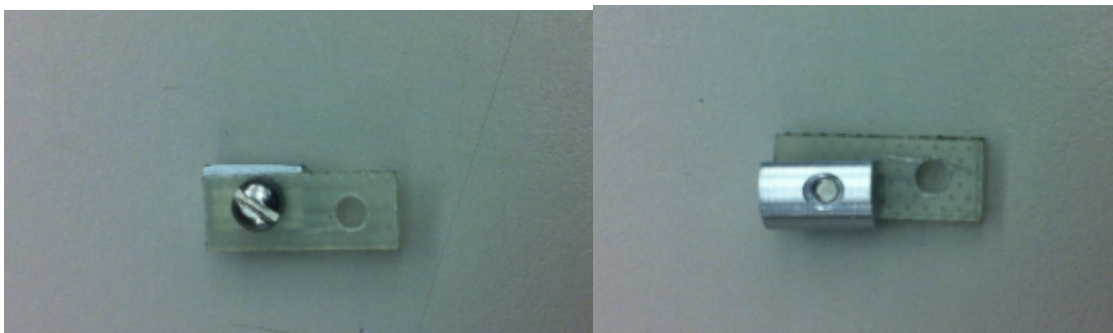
Wire mounting pieces, aluminum block and tab.
